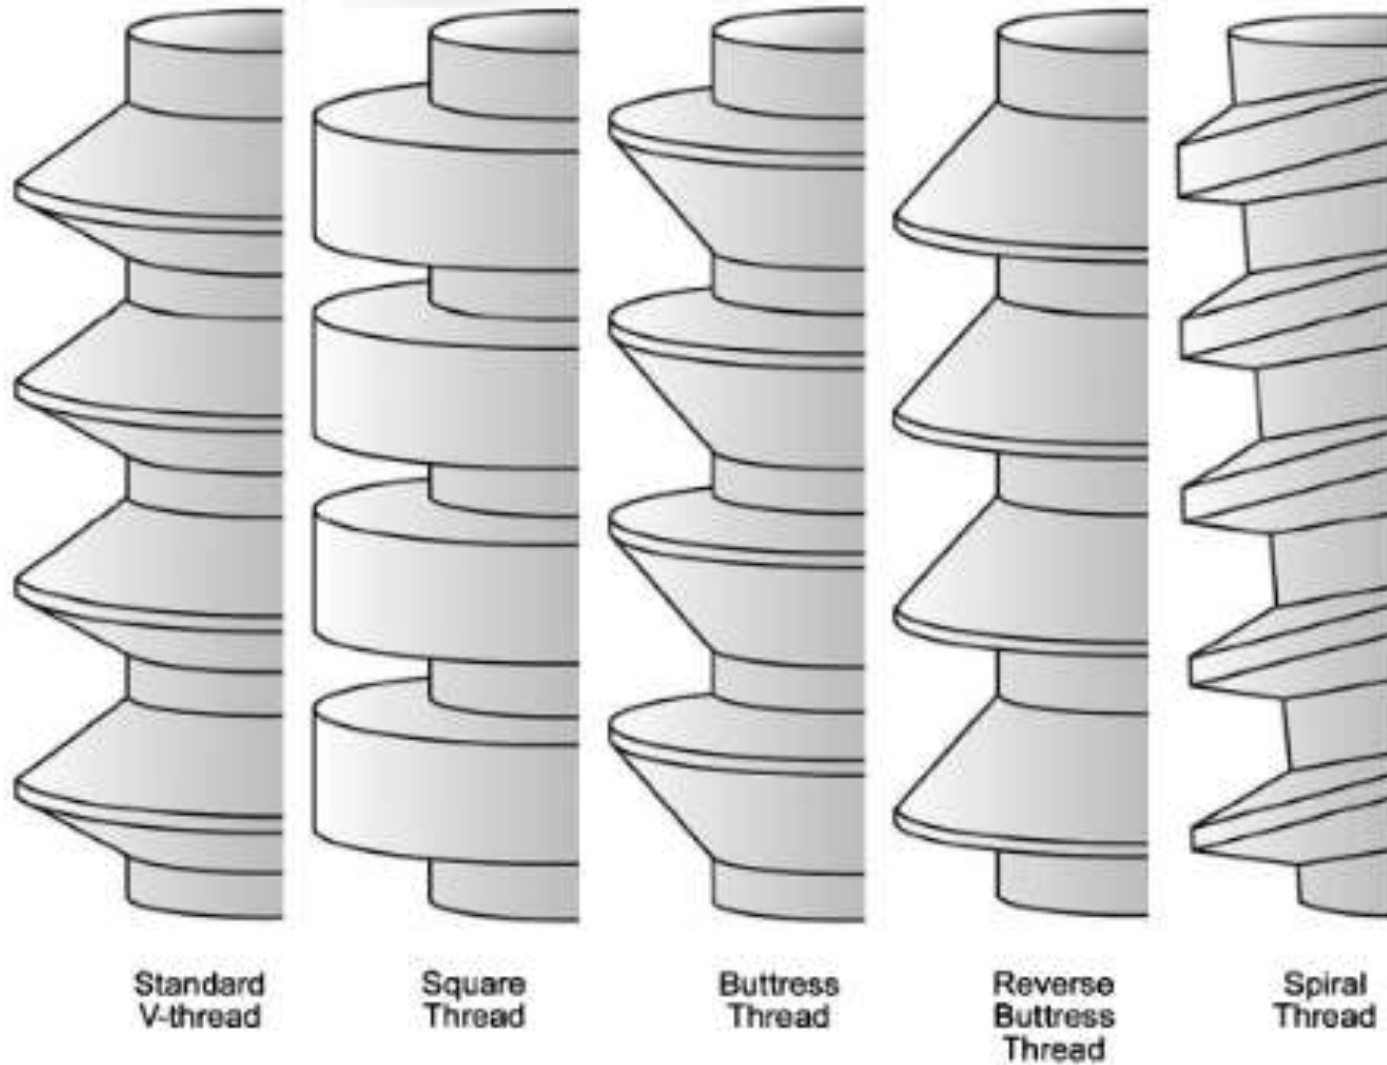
Currently available implant thread pattern types.: V-thread, square thread, buttress thread, reverse buttress thread and spiral thread.
